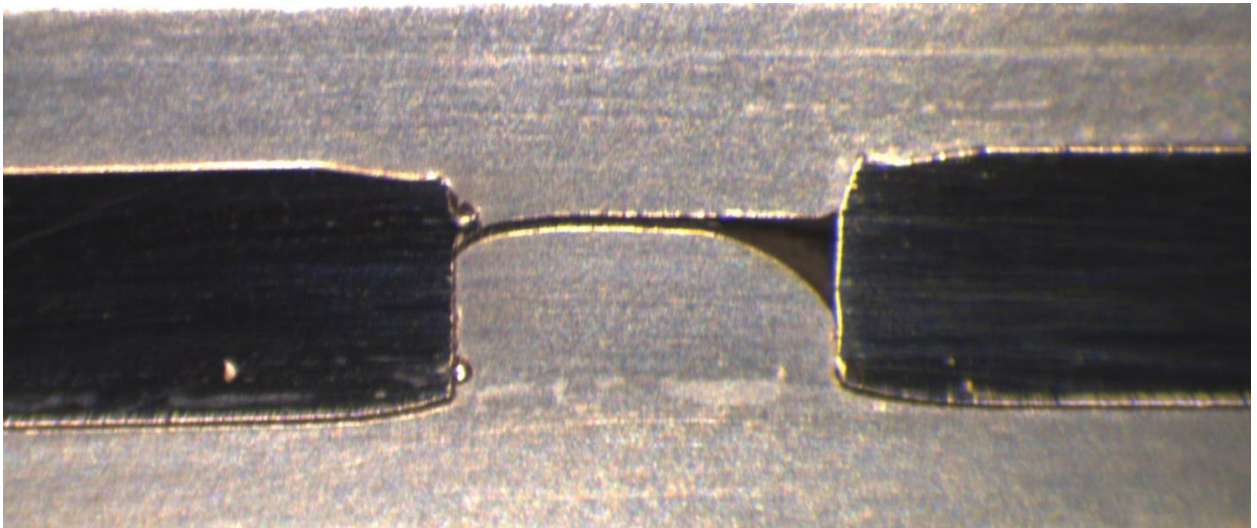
Al-Steel-Al with a through hole. 1200 rpm, 1 sec, 4250 N control force. The extruded material has not completely filled the volume of the through hole. No weld joint is formed.
